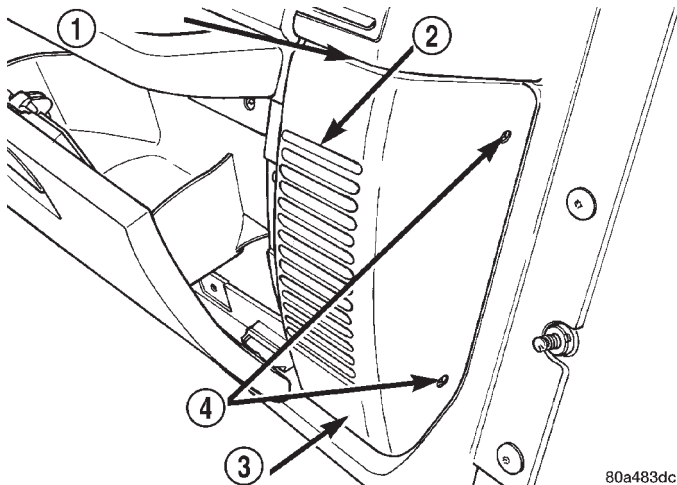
Instrument Panel Speaker Bezel Remove/Install
